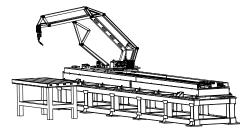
The new ship welding robot of controllable metamorphic type
